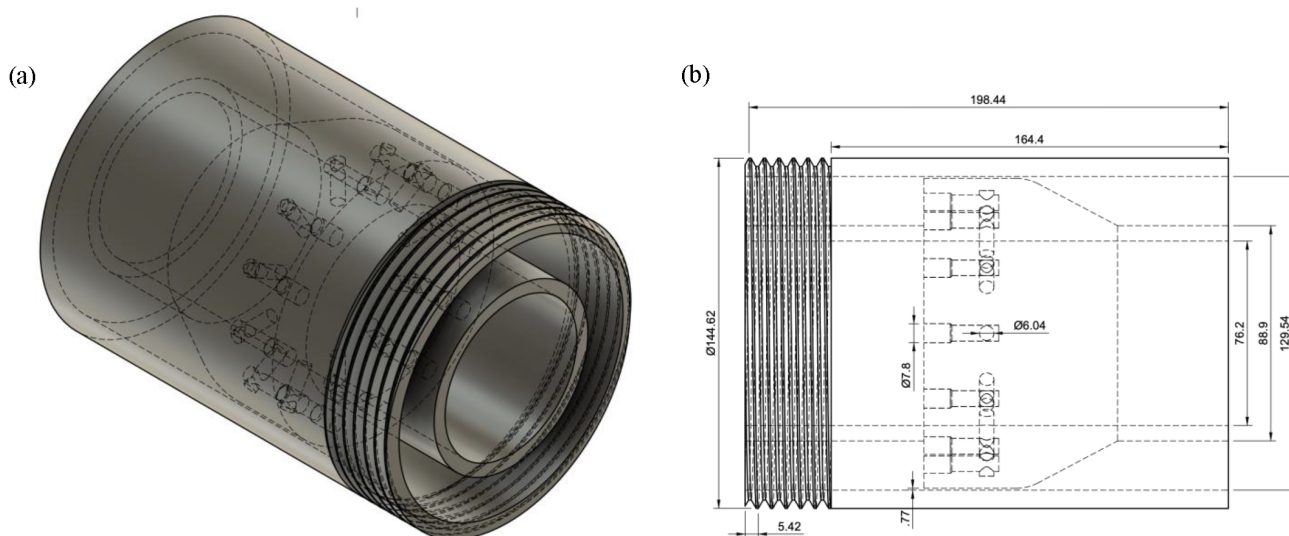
Design of the C-AICD fixture, (a) isometric view of the 3D CAD model, (b) detailed 2D drawing with dimensions.
